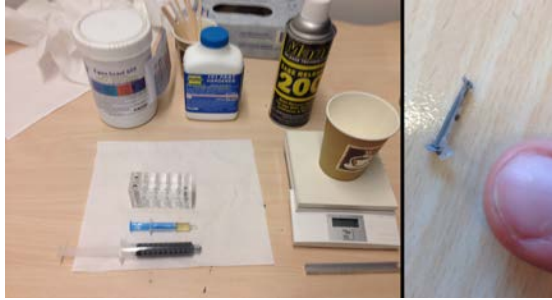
Left: The setup and materials that were used for casting. Right: One of the tacks that comes out of the mould.
